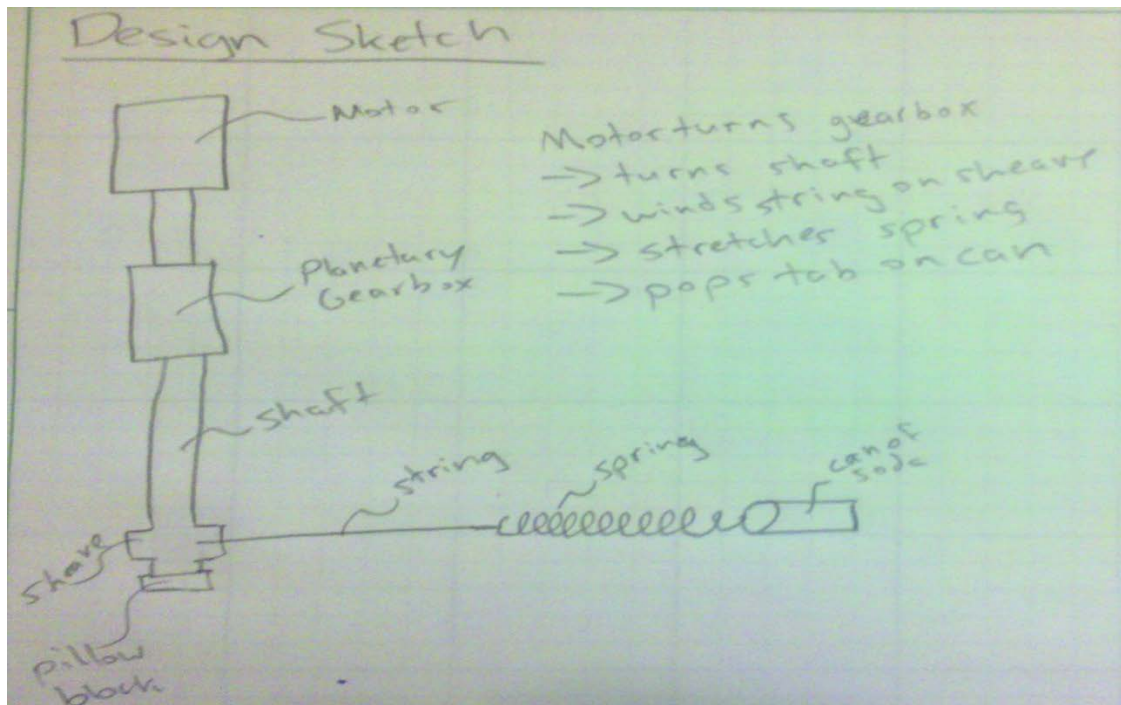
Simplified sketch of what the final design will look like provided all calculations work out.
